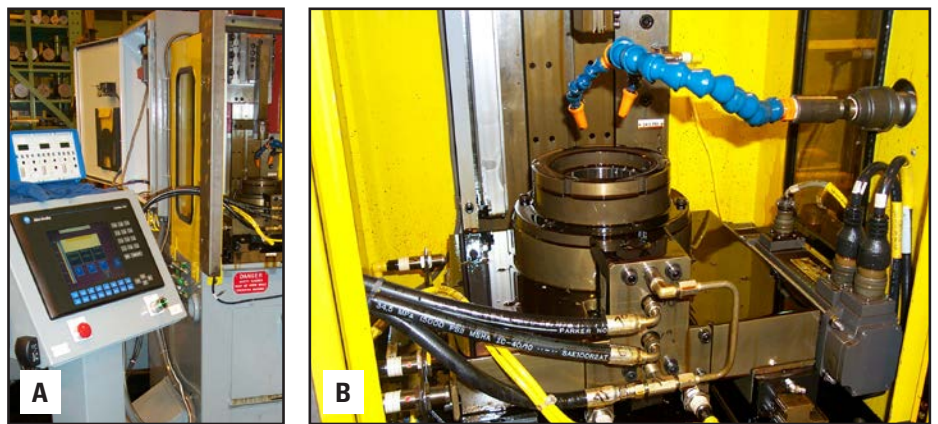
Shown: a) broach machine, control stand and dynamometer modules; b) control table, clamping device with test ring inside and coolant lines.
